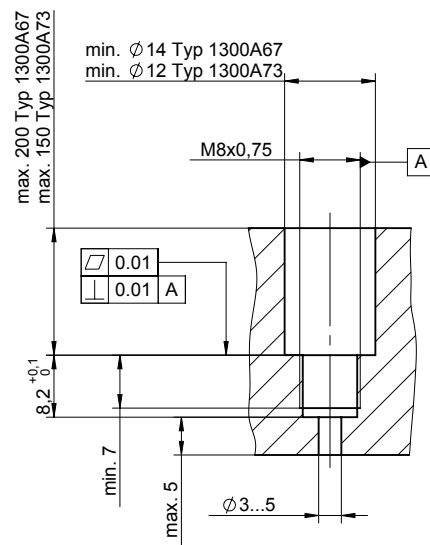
Recessed mounted sensor. Shows the bore of 14 resp. 12 mm diameter for the standard mounting
